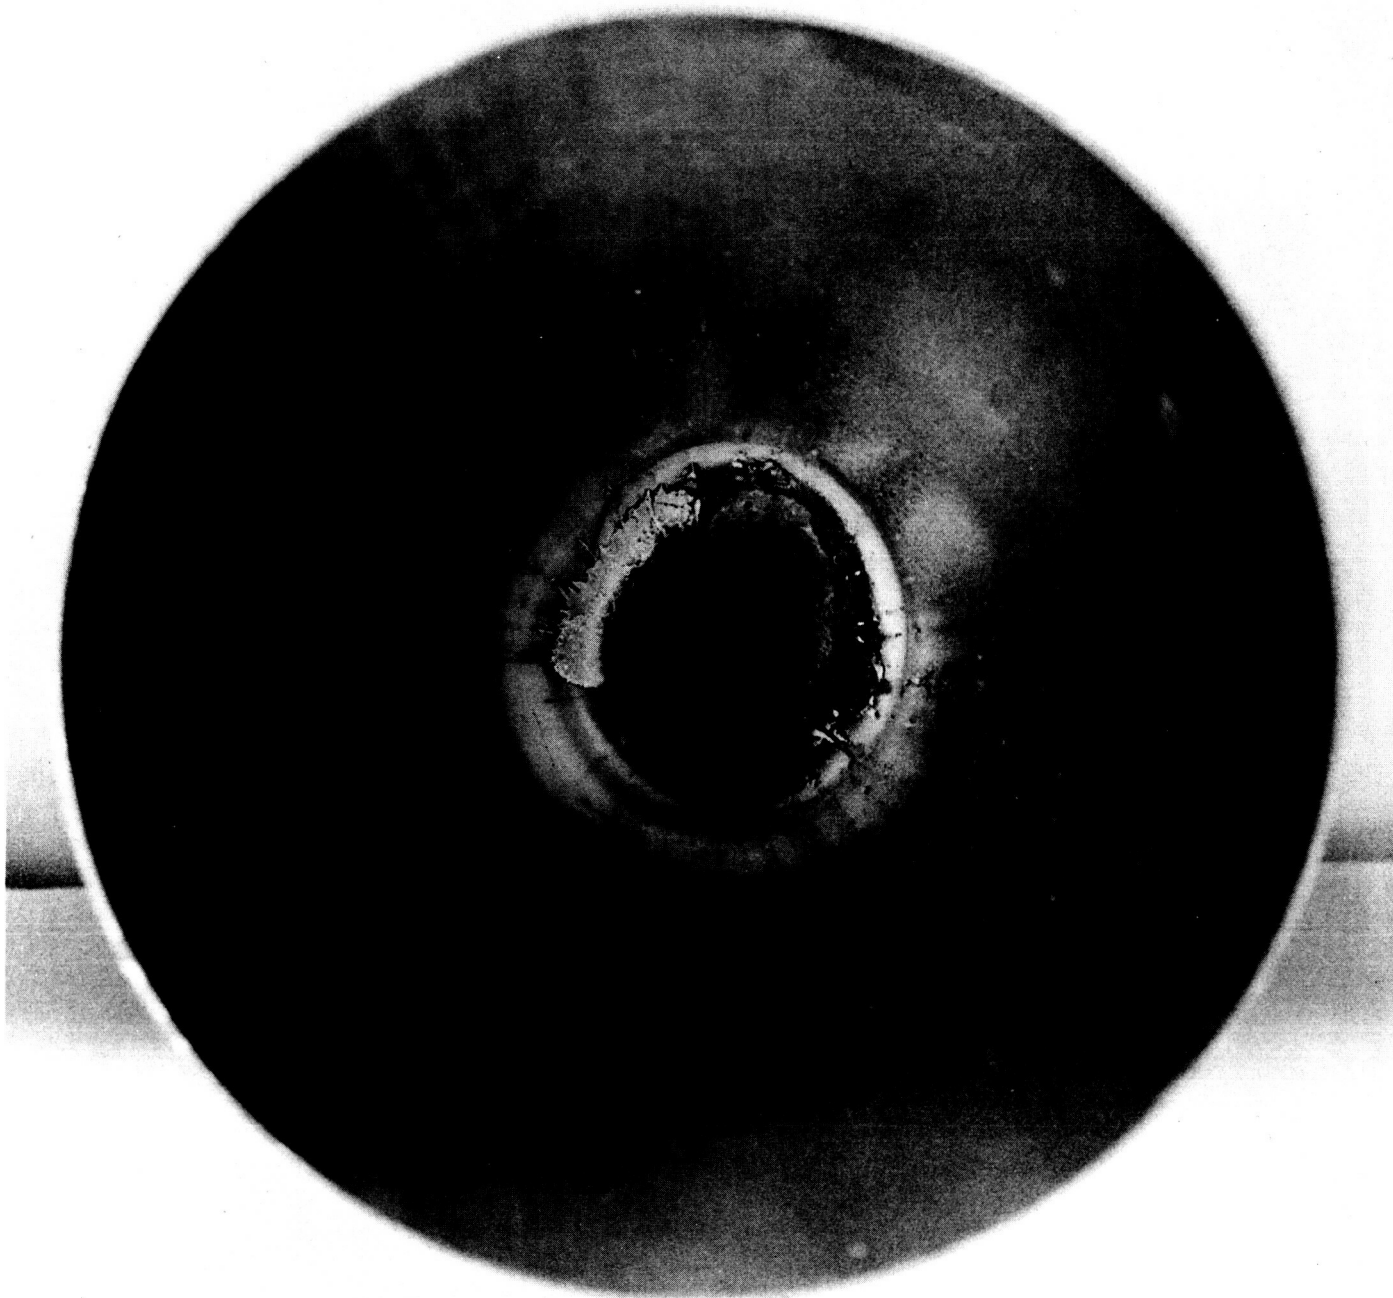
Chamber Assembly From Engine S/N 1 After Test Looking at Throat
